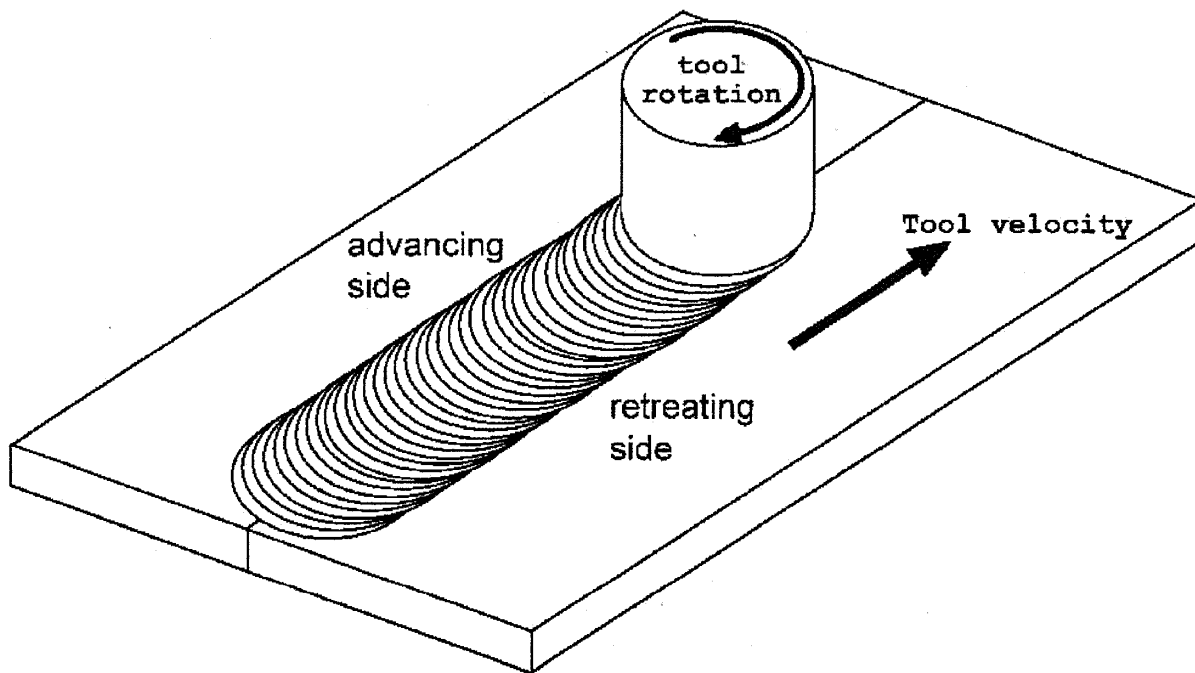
Schematic Diagram of Friction Stir Welding
